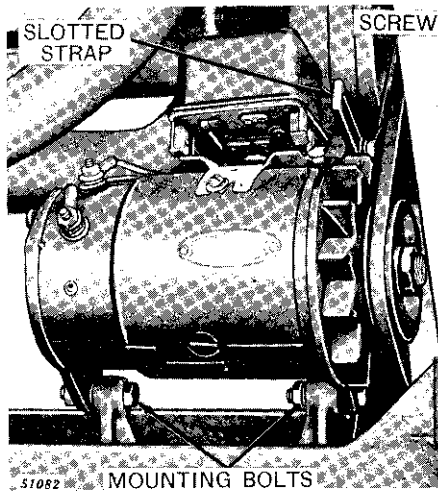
Generator Mounting Bolts, Adjusting Screw and Strap
